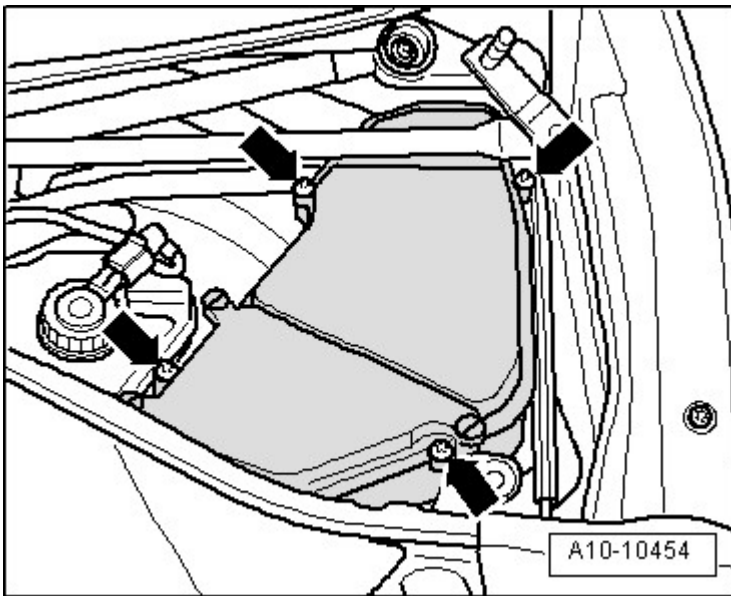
Identifying Bolts To E-Box Plenum Chamber Cover -Arrows-
